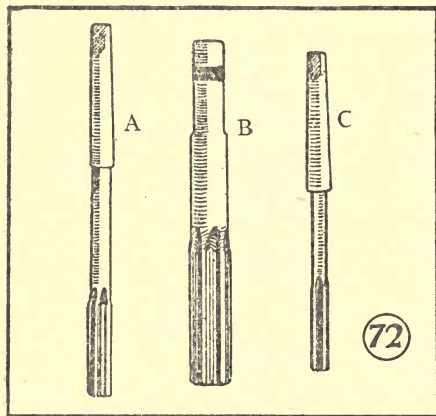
A is the 29/64-in. reamer to ream the push rod holes 1/64 in. oversize; B is the camshaft bearing bushing reamer, and C is the 21/64-in. reamer for reaming the valve stem guides 1/16 in. oversize
